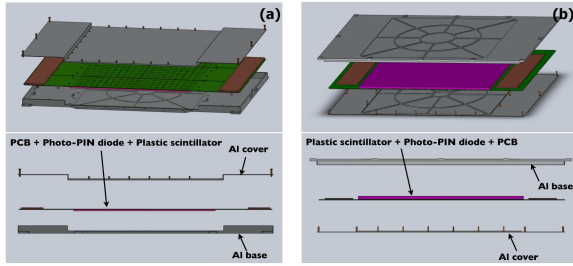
Exploded view of the (a) TCD, and (b) BCD.
